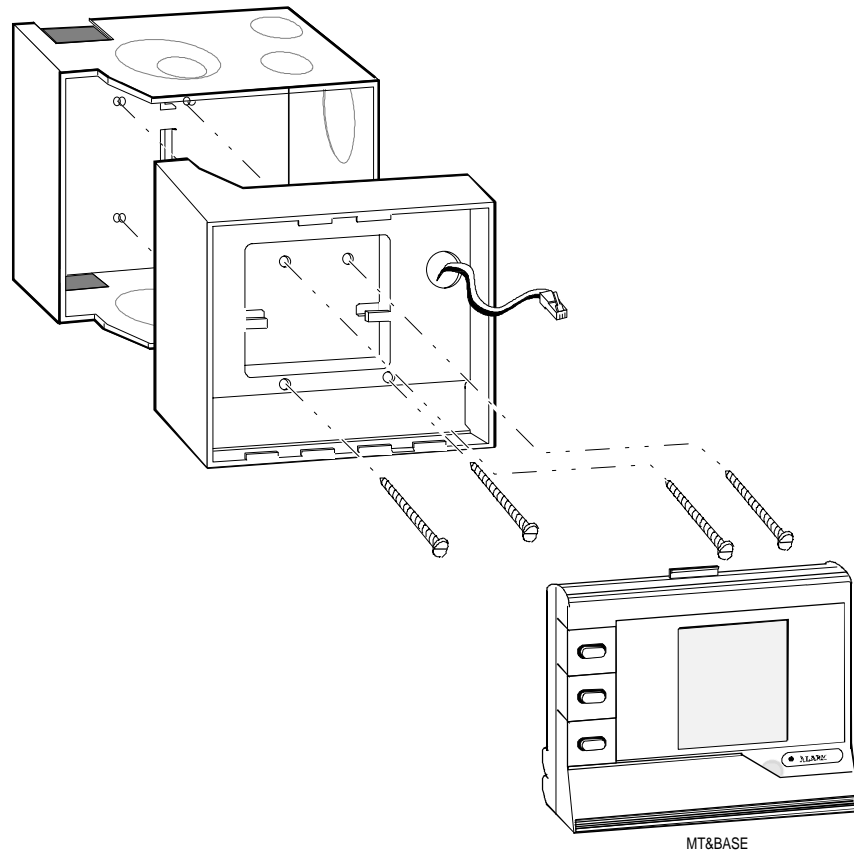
Attaching the Enclosure Kit and Utility Mounting Base
